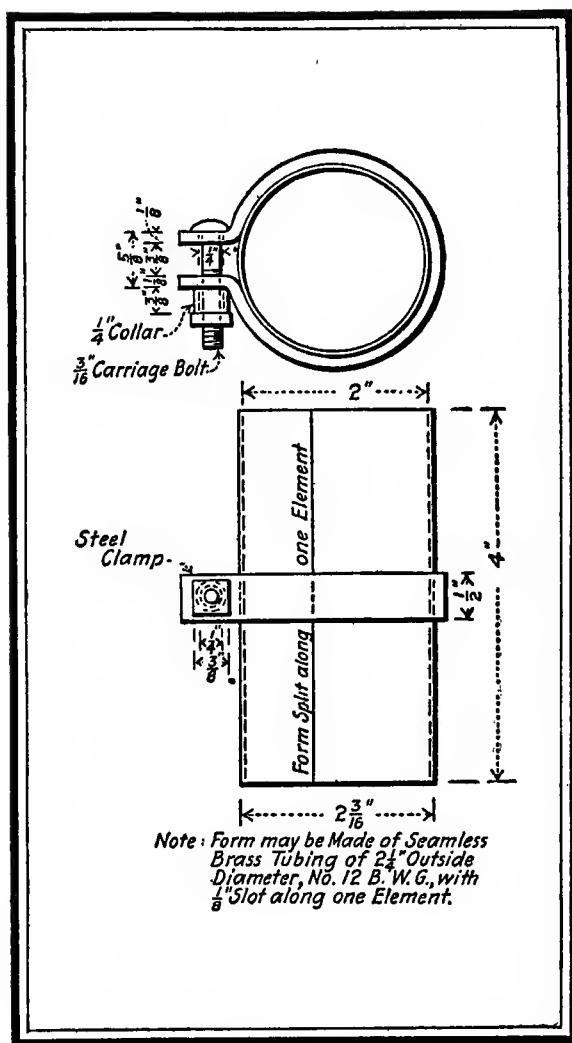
Details for 2 by 4-in. Cylinder Form
